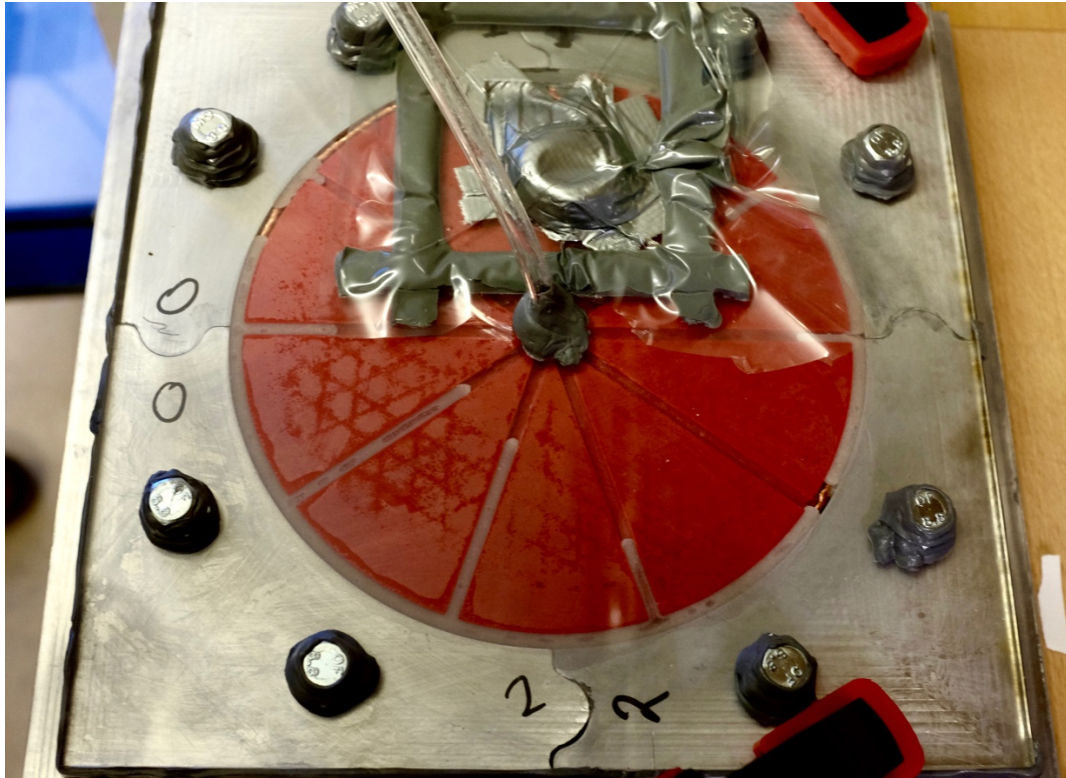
Vacuum Infusion of Stator Prototype – Sealed Mold
